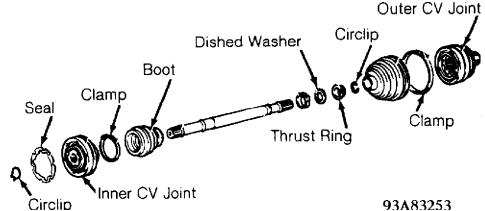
View Of Axle Shaft (Man. Transaxle Shown; Others Similar) Courtesy of Volkswagen United States, Inc.
